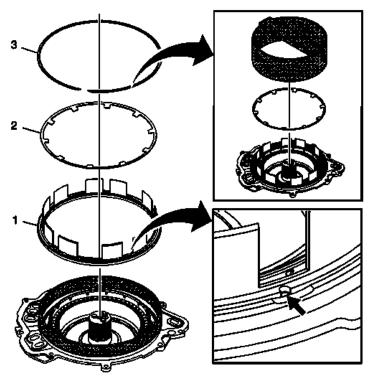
View Of 2-6 Clutch Piston Courtesy of GENERAL MOTORS COMPANY
